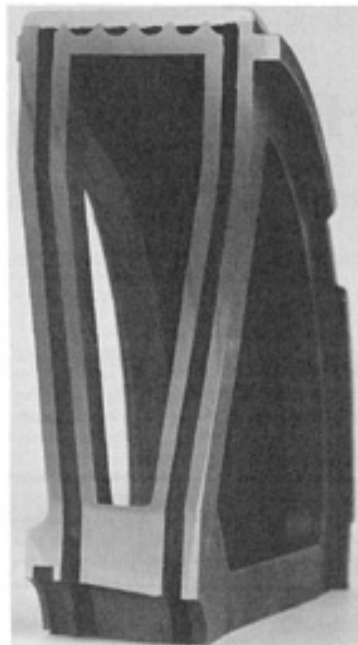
ROTATING X-RAY ANODE WITH OUTER ALUMINUM RING DIFFUSION WELDED TO STAINLESS STEEL BODY
